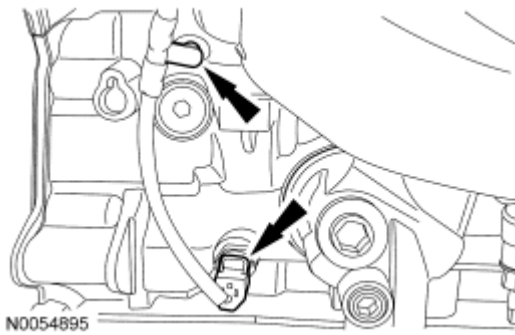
Locating Engine Oil Pressure (EOP) Switch Electrical Connector & Wiring Harness Pin-Type Retainer
